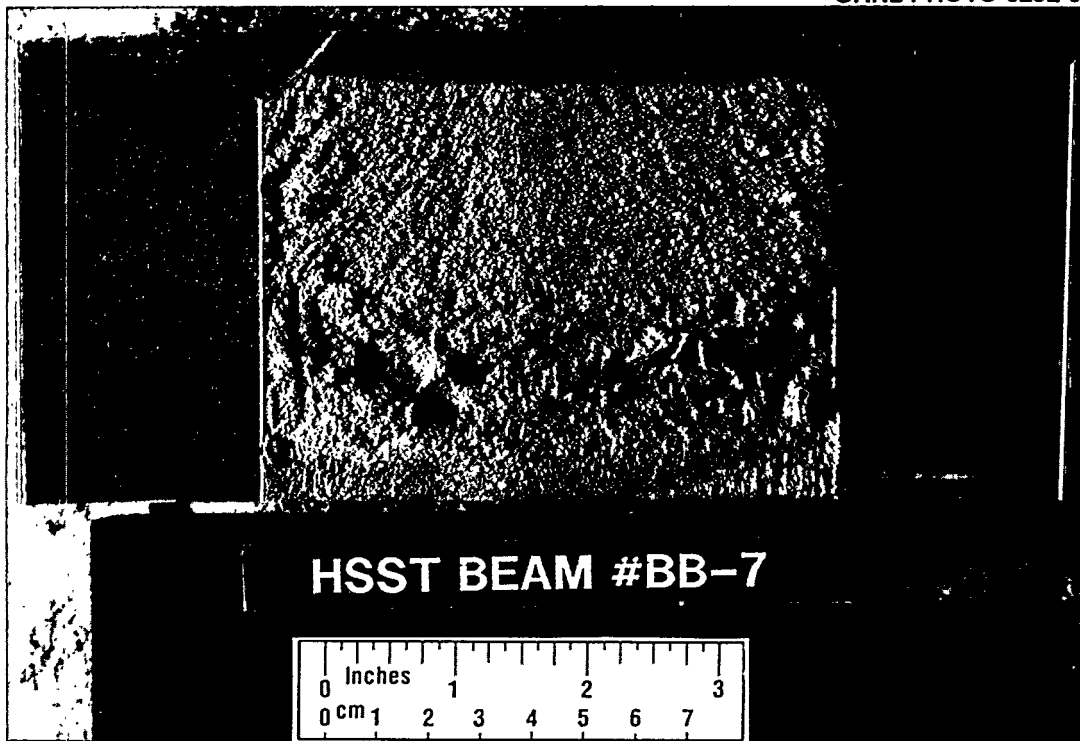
Fracture surface for shallow-flaw cruciform specimen BB-7 with fracture initiation site indicated
